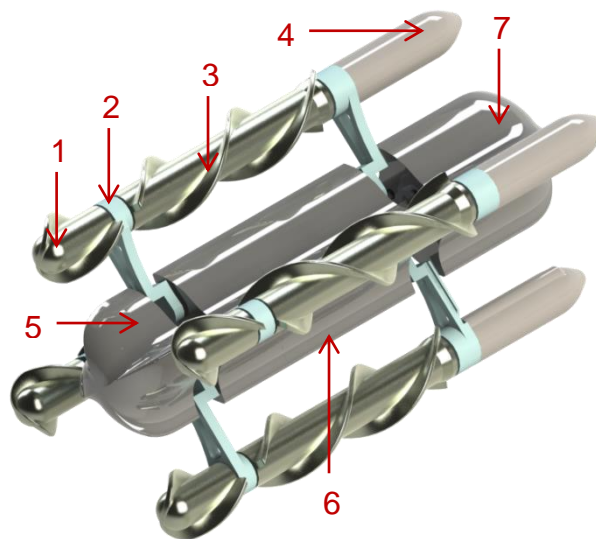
Computer model showing the locomotion system version 3, Quad Screw Device Version 3. Annotations show: 1) Front-section screw; 2) Controllable arm section; 3) Mid-section screw; 4) Screw motor housing; 5) Front chassis section with space for camera module; 6) Central chassis section housing arm motor and gears; 7) Rear chassis section with space for motor controllers, communication electronics and tether mount.
